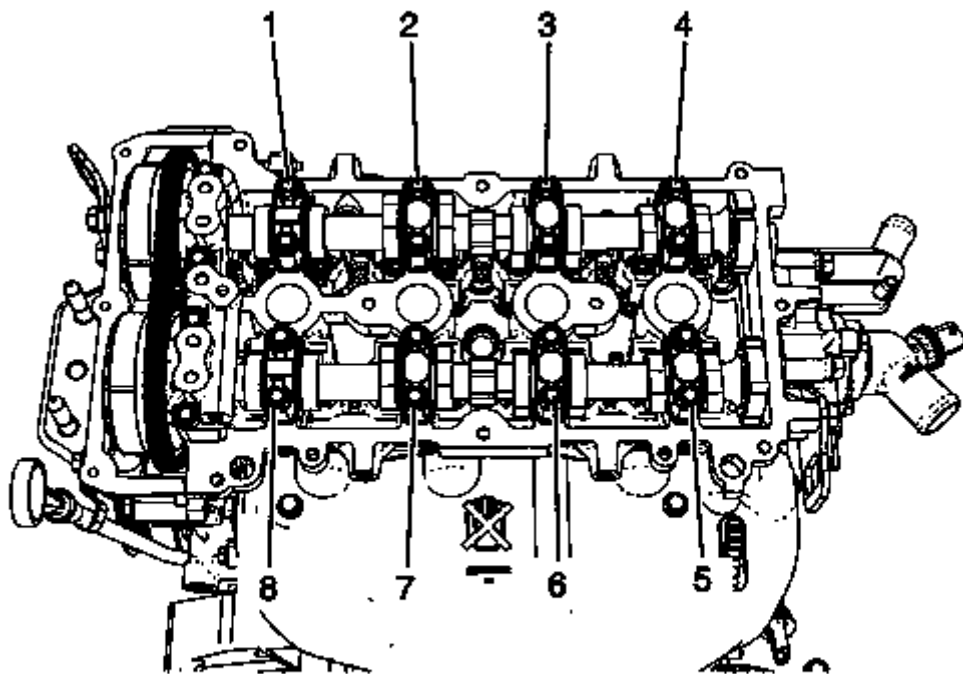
Measuring valve clearance At positions (1), (2), (6) and (8)
